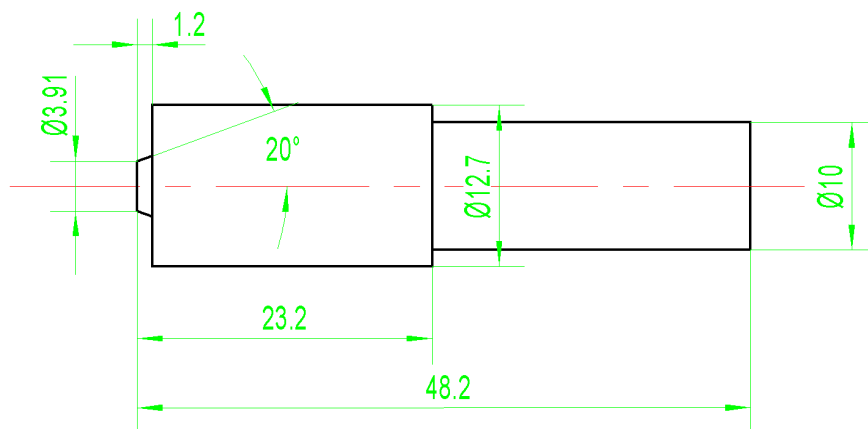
Detailed dimensions of the FSW tool (Unit: mm)
